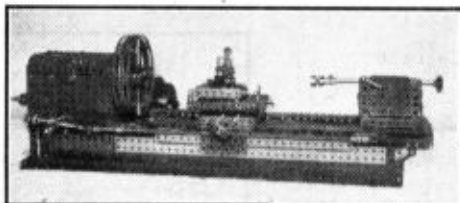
A well-constructed lathe built from Meccano parts. A close-up view of the sliding carriage is seen in Fig. 2, on the right.
